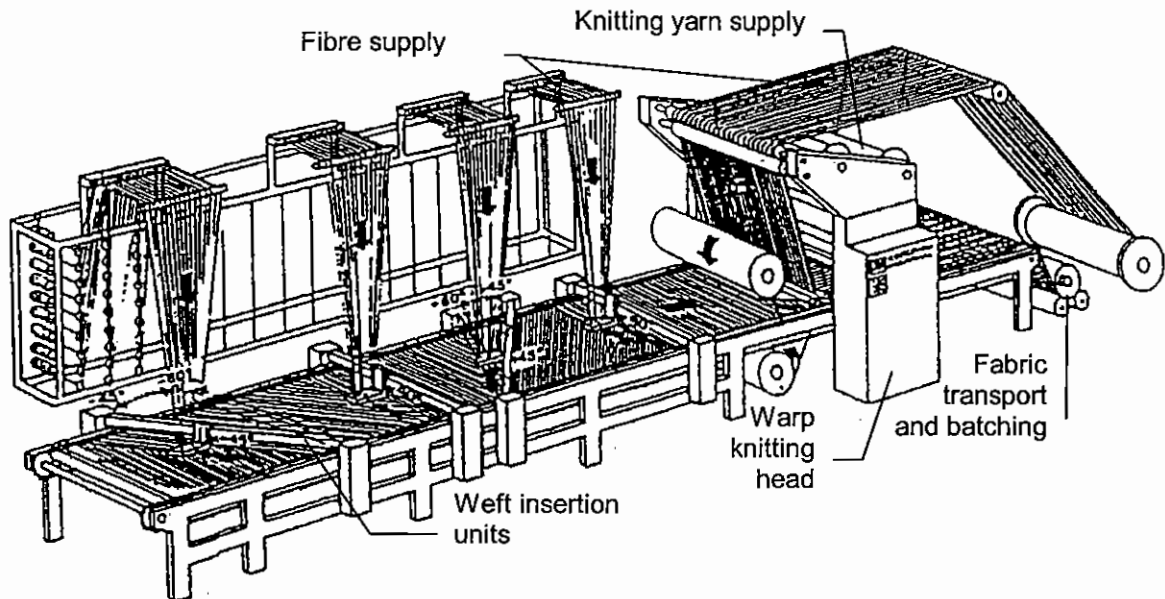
LIBA multiaxial machine with four weft insertion units⁶⁹
